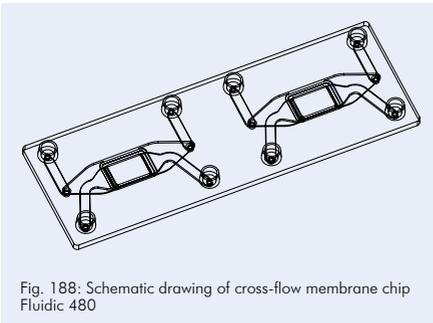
Schematic drawing of cross-flow membrane chip Fluidic 480
